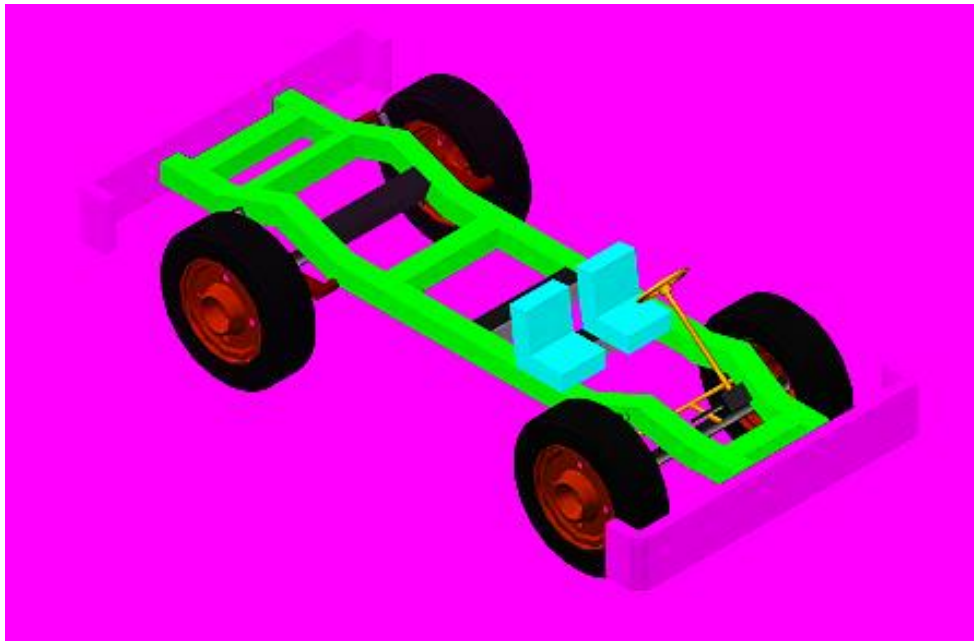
Model of chassis frame and some connected parts of pickup chassis frame
